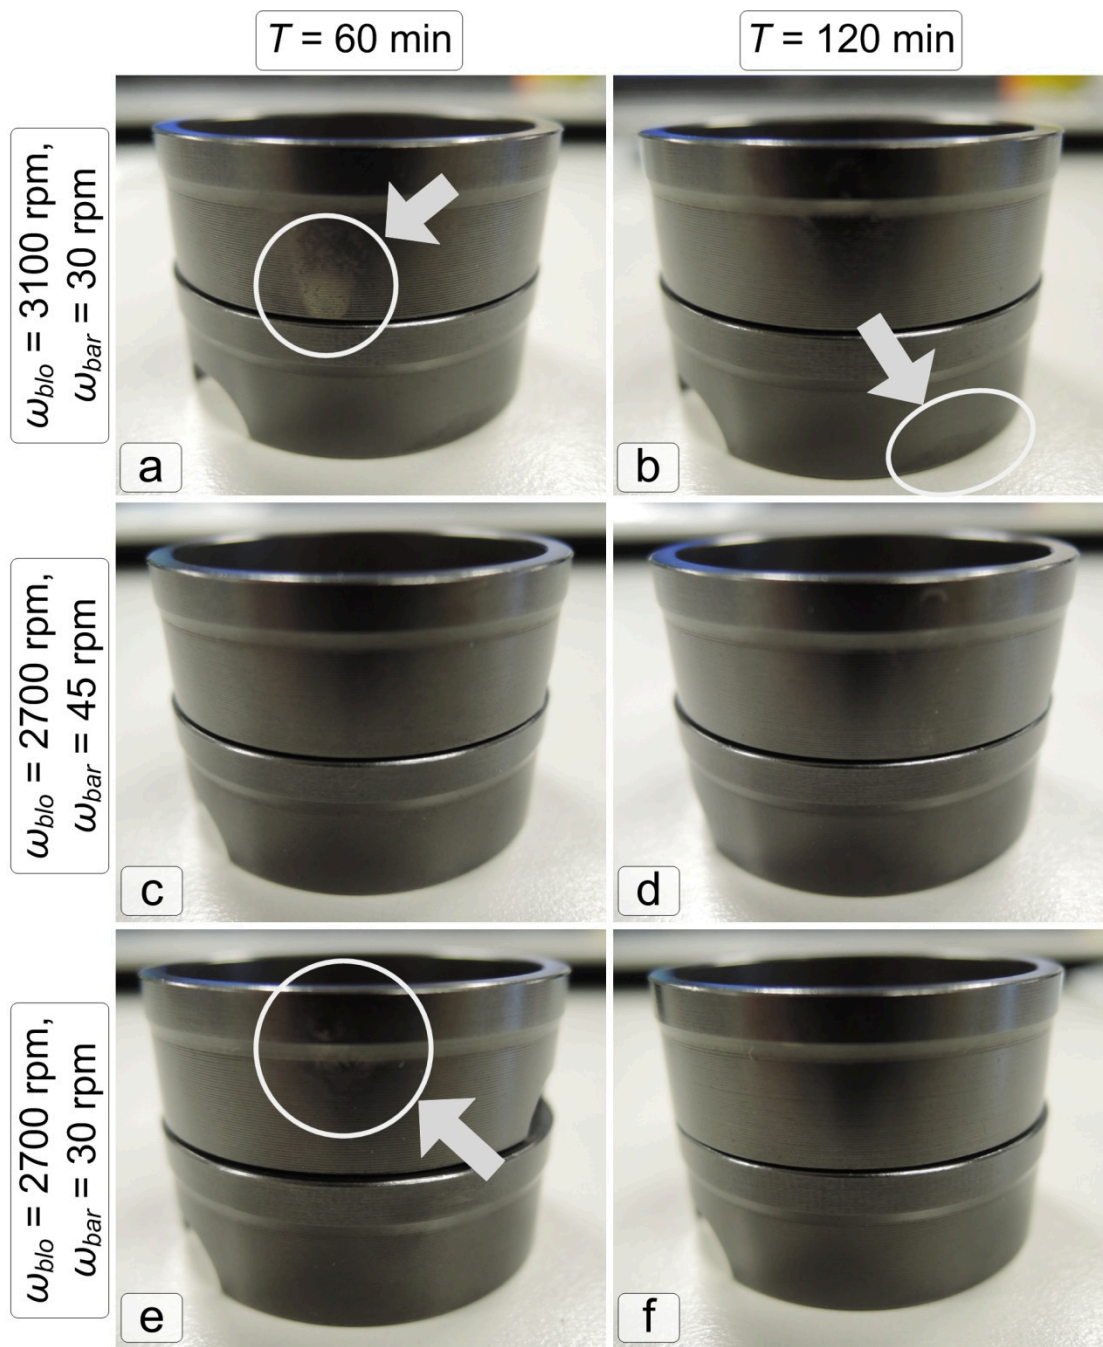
Visual inspection of workpieces after dry mass finishing process
